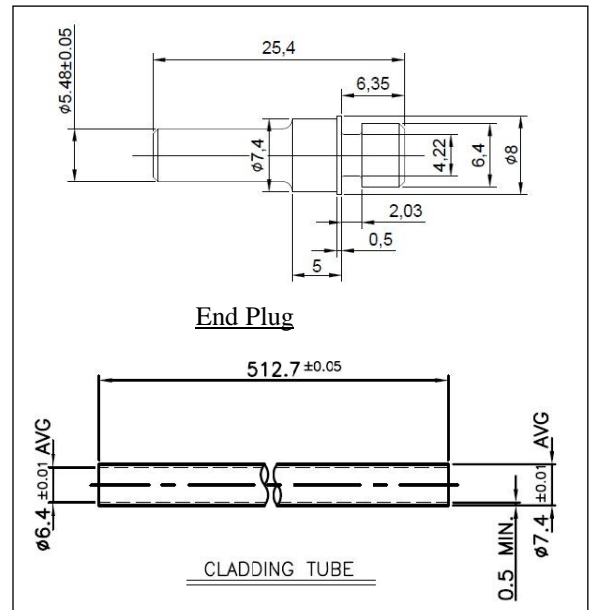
Weld joint parts and shape for SFR fuel elements closures
